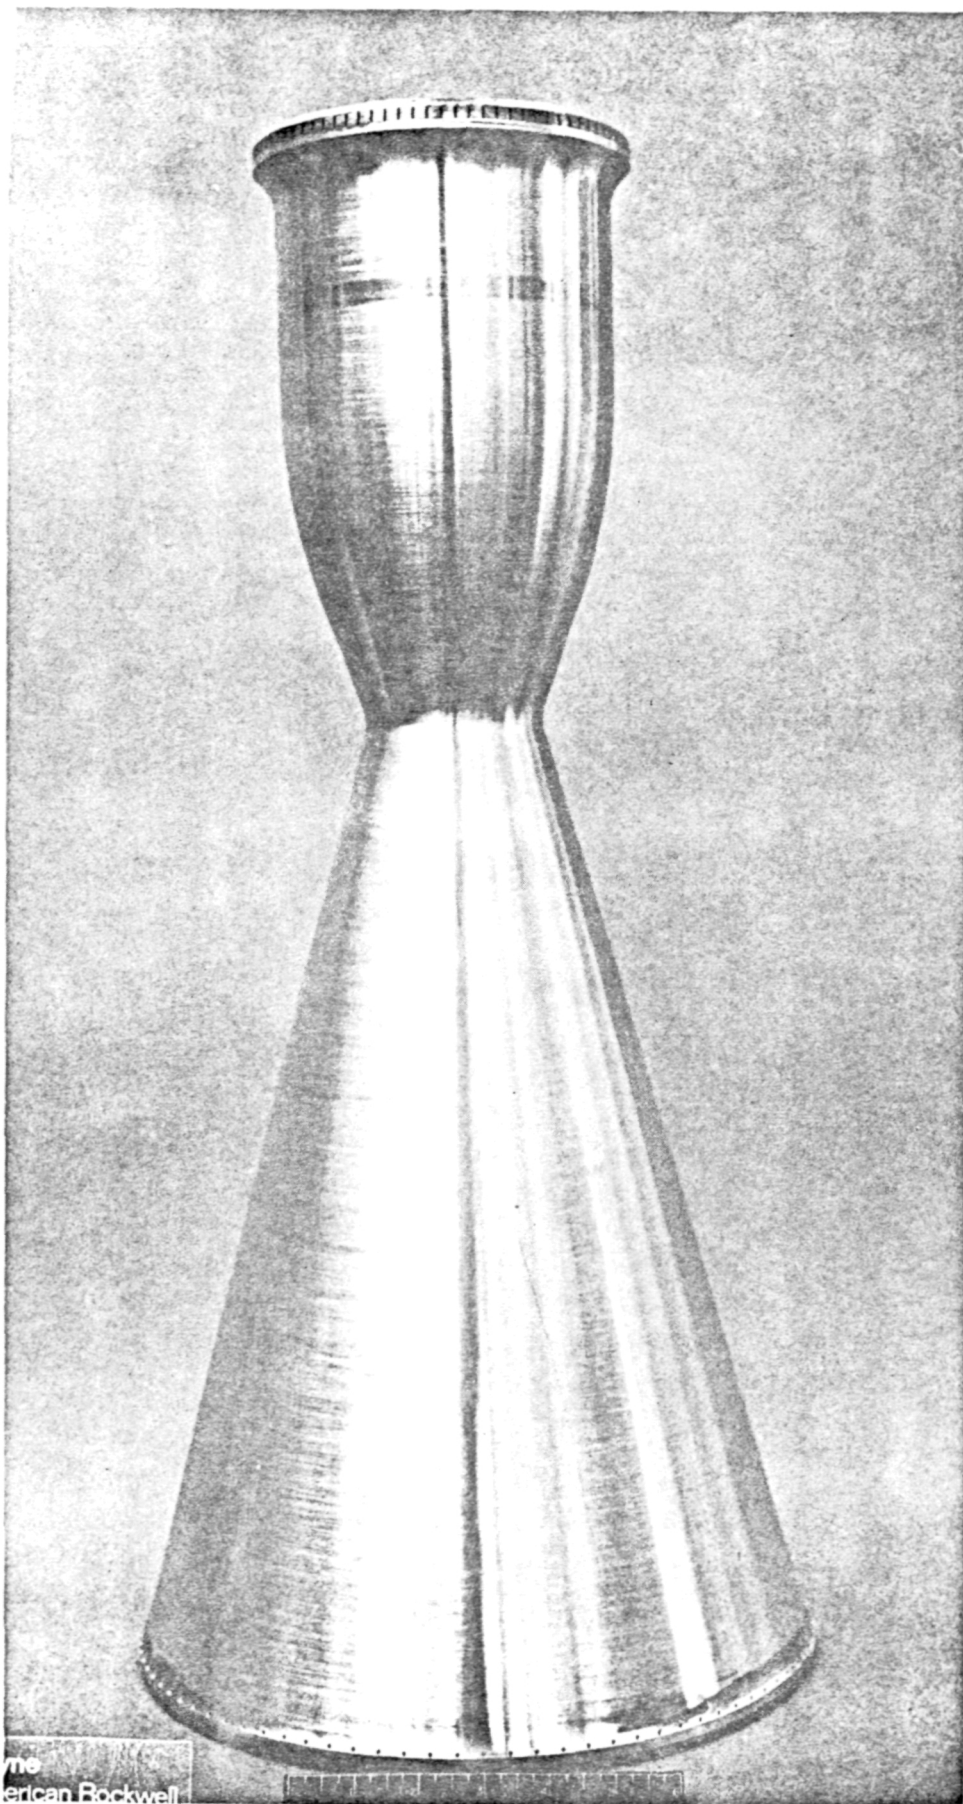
, Machined No. 1 Regeneratively Cooled Thrust Chamber Prior to Manifold Attachment.
